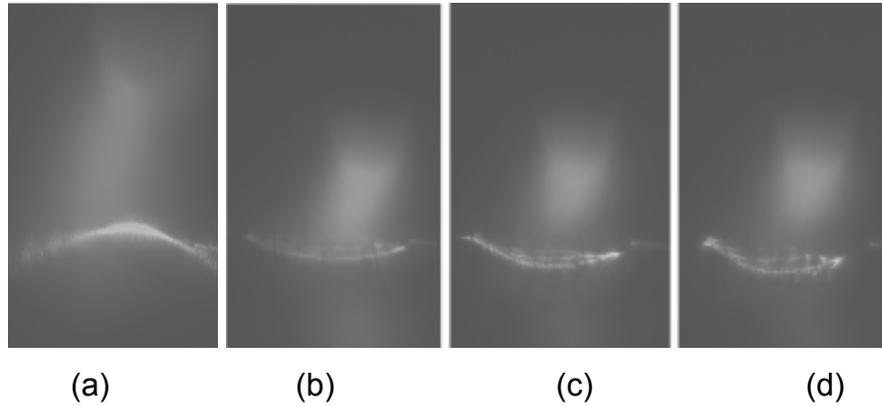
, (a) laser reflected from convex weld pool surface, no penetration; (b) Laser reflected from concave weld pool surface, little penetration; (c) welding current increased to make greater penetration; (d) penetration increased with increase of welding current. [34]
